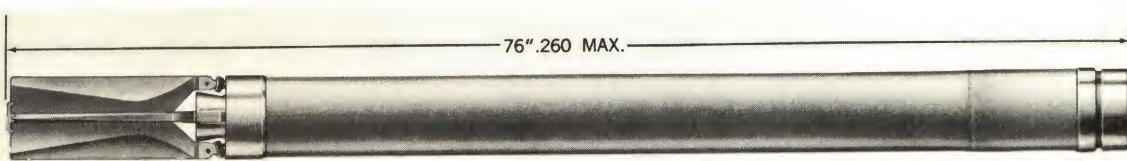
5.0-Inch Rocket Motor Mk 16 Mod 1, External View.
